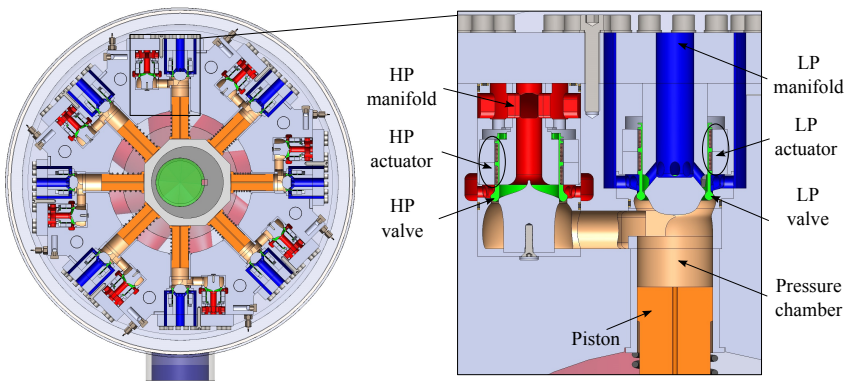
Section view of the motor slice, illustrating the radial piston setup with eight pressure chambers. Each pressure chamber is connected to the LP manifold and the HP manifold with annular seat valves.
